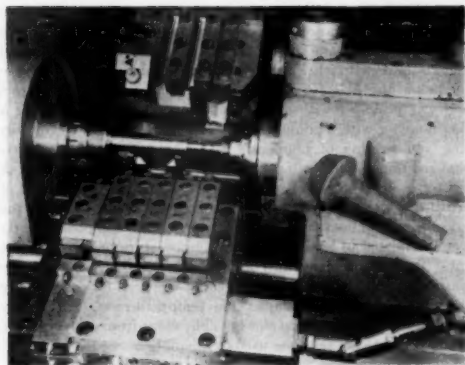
TOOLING FOR AUTOMOTIVE DRIVE PINION FORGING ON A 16-IN. FAY AUTOMATIC LATHE
